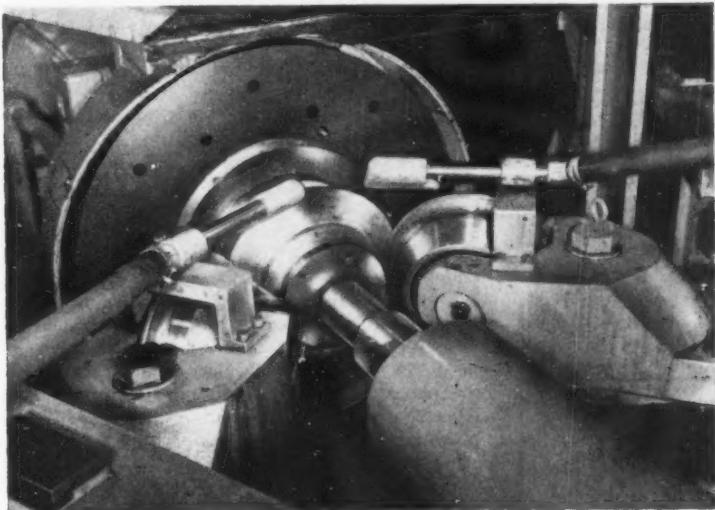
Set-up for Flow Turning a Rear Bearing Support for a Gas Turbine Compressor from a Pre-machined Forging of AMS 5613 Stainless Steel
